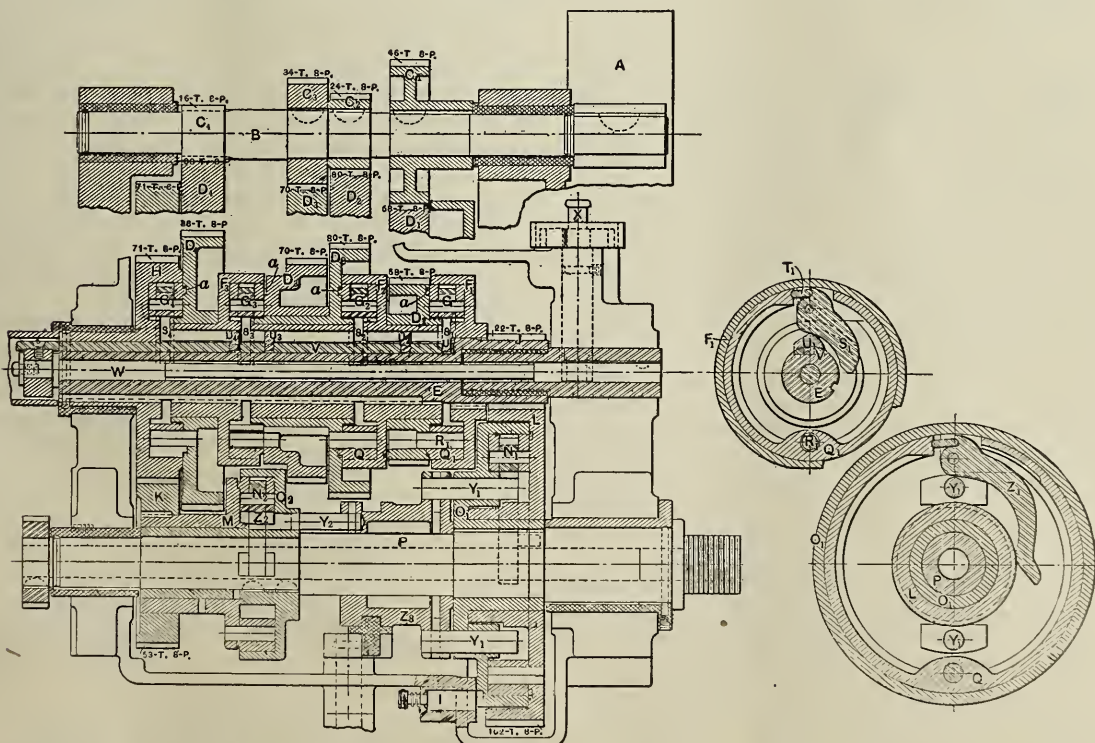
Head Stock Spindle, Showing Gearing, and Positive Action Friction Clutches Which Control Speed Changes.
